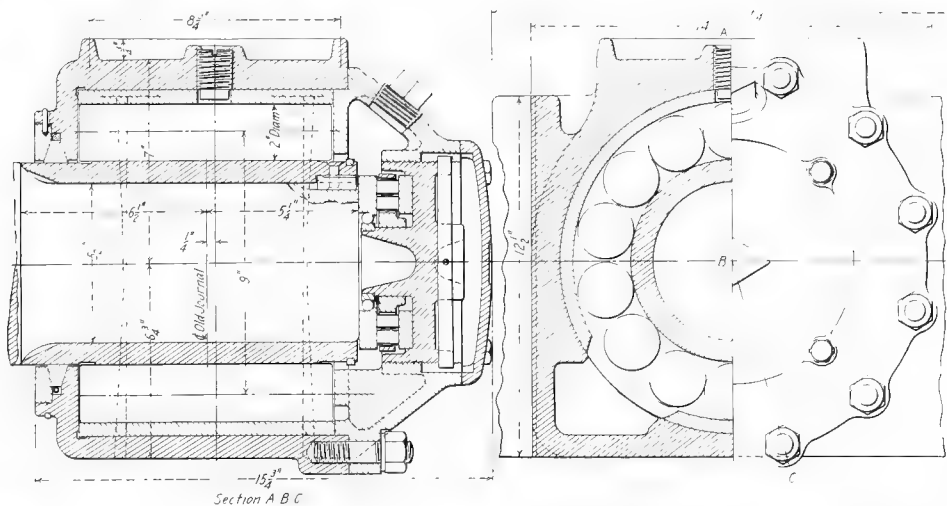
Roller Bearing for 5 in. by 9 in. Journal. Standard Roller Bearing Company.
